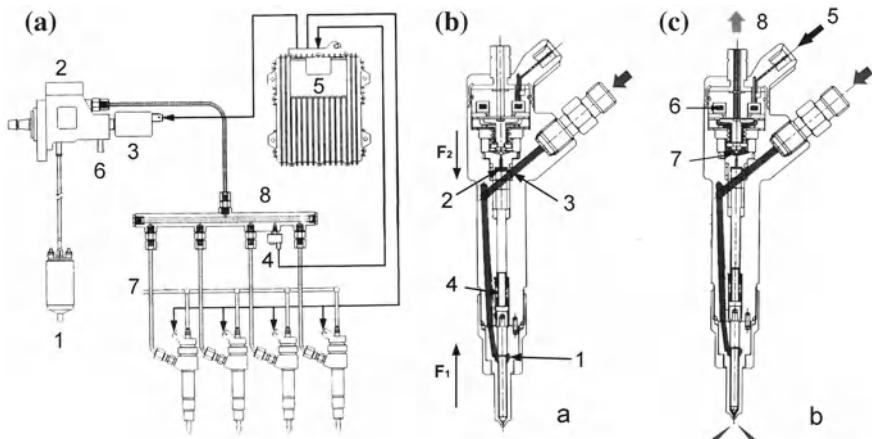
Common Rail solution with solenoid valve injectors driven by the engine electronic control unit (courtesy of FIAT)
